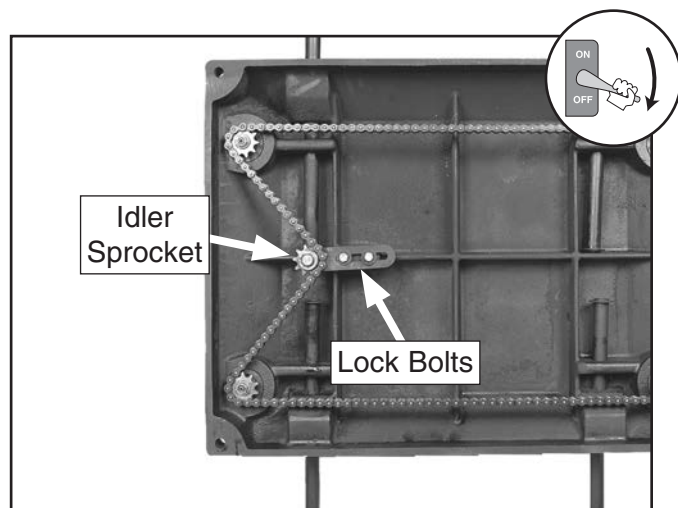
Table height idler sprocket and lock bolts (viewed from underneath the planer base).
